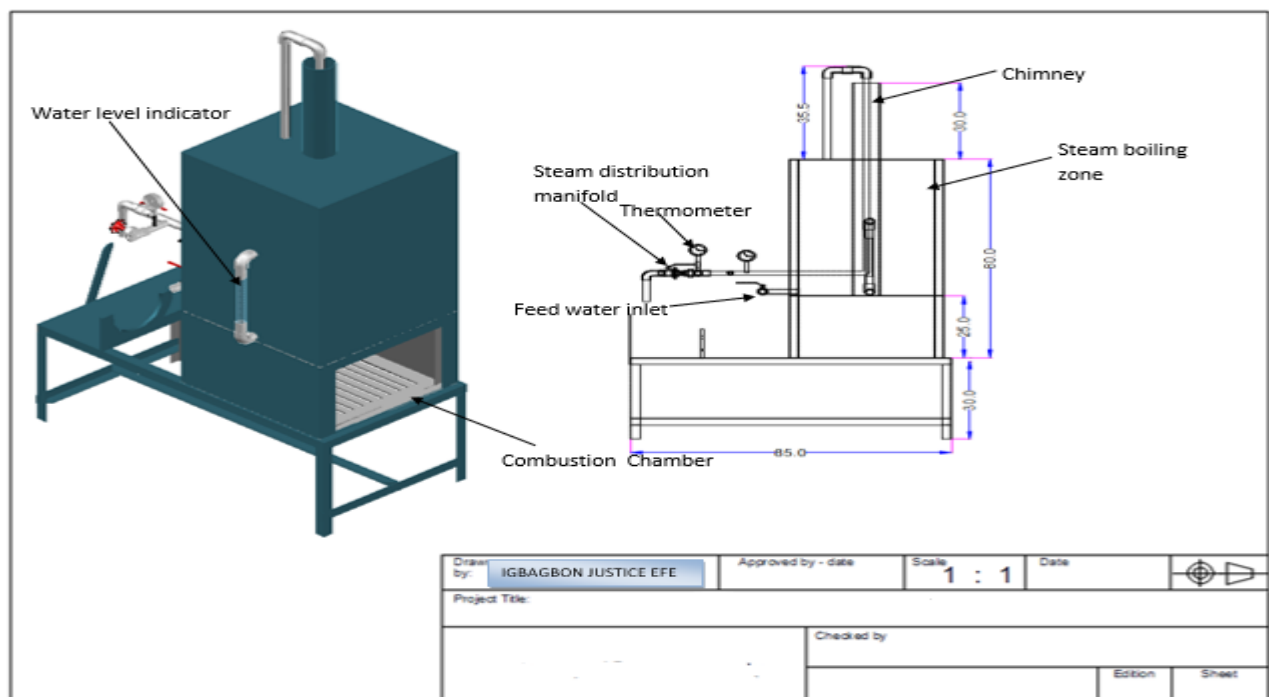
Isometric view of the miniature steam boiler for generation of steam
